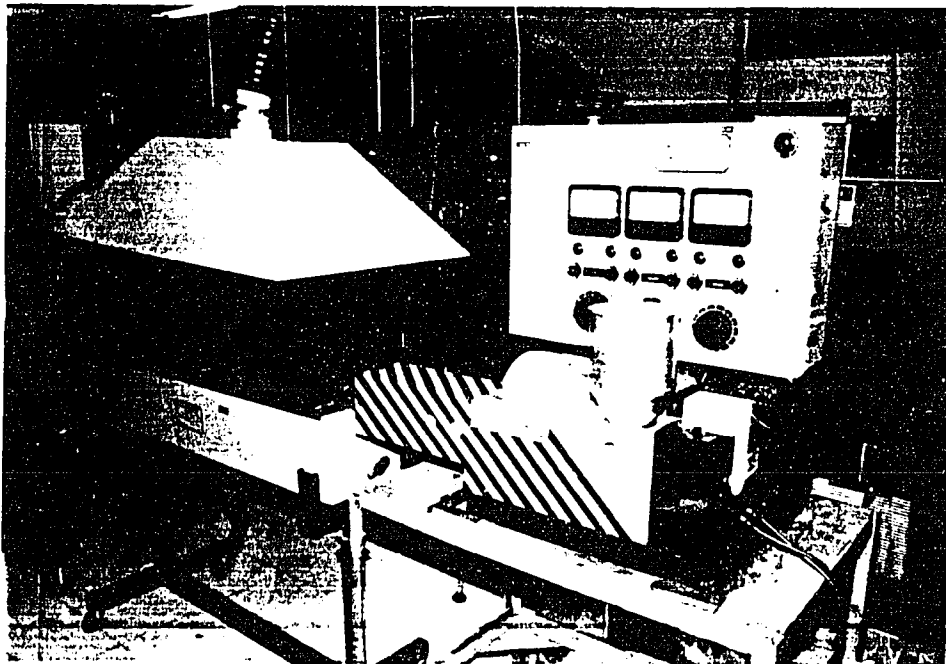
Extruder Manufactured by Wayne Tool and Die, Co.
